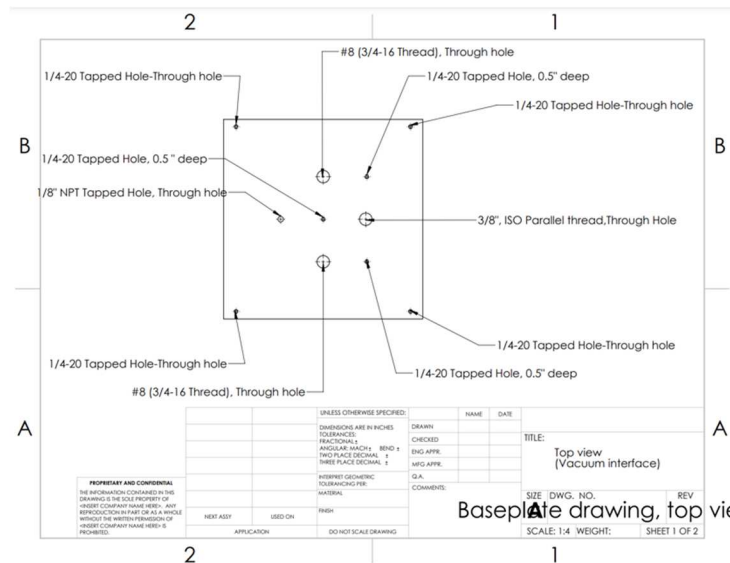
Dimension and placement of threaded holes machined into the Stainless-steel baseplate
